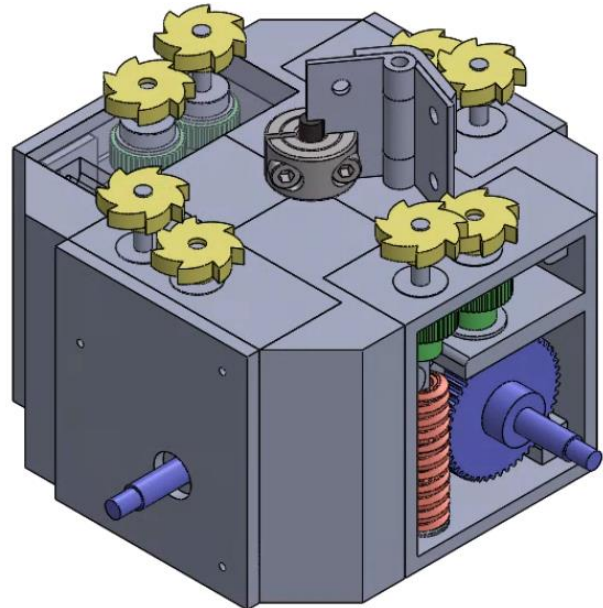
A full assembly CAD model of the 4 DOF prototype SAMM mechanism. The four modules exhibit rotational symmetry with respect to the motor shaft. The cover of one module has been removed for better visibility.
